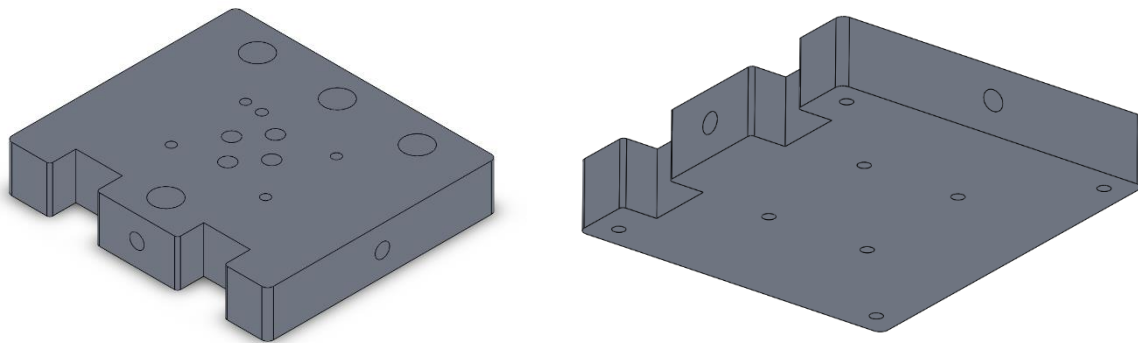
Hydraulic sub-plate (a) top view and (b) bottom view.
